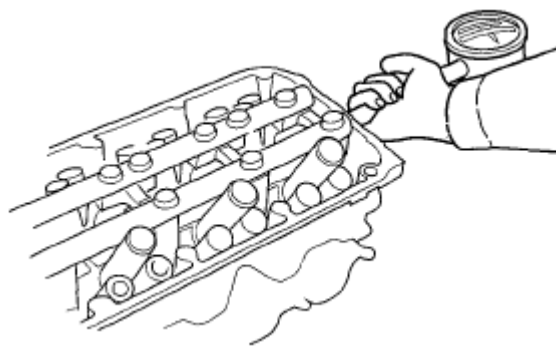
Identifying Camshaft-To-Holder Oil Clearance
